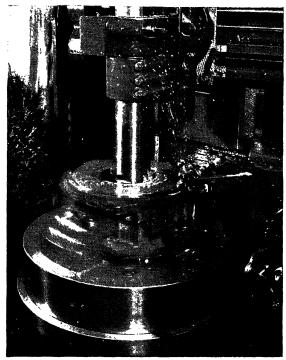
Special tool for machining locomotive driving boxes. Note the side head that cuts simultaneously with the main head. (*The Bullard Co.*)
